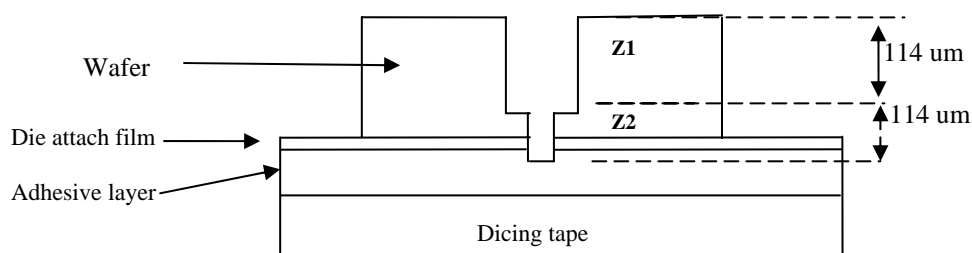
Illustration of the step cutting with cutting depth dimension for Z1 and Z2.
